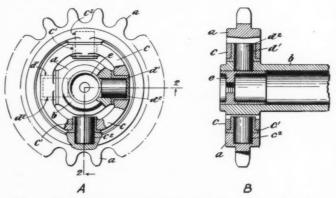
Universal mounting of sprocket prevents chain twisting when misalignment occurs
